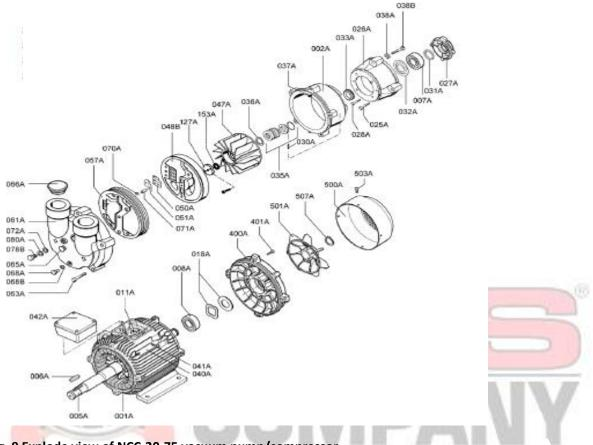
Explode view of NCC-20-75 vacuum pump/compressor
